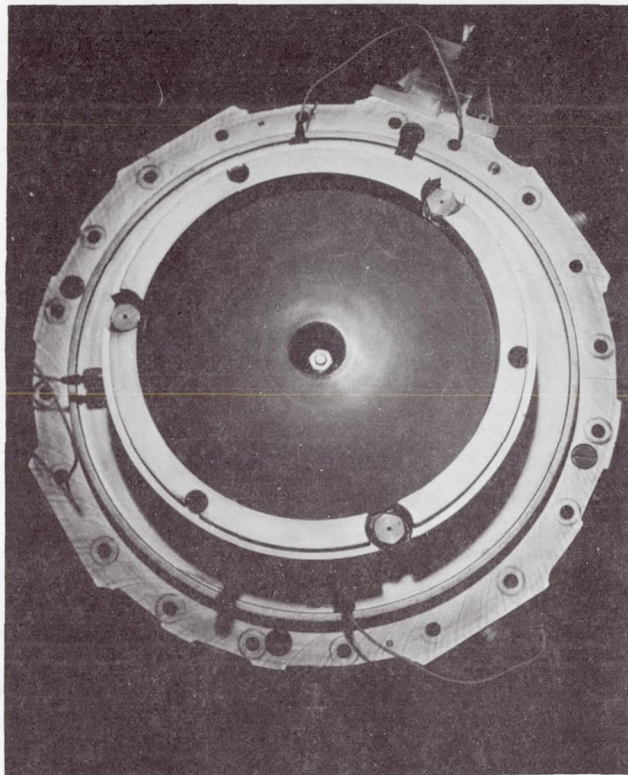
Thrust Runner Installed in Reverse Thrust Stator (CN-9492)
